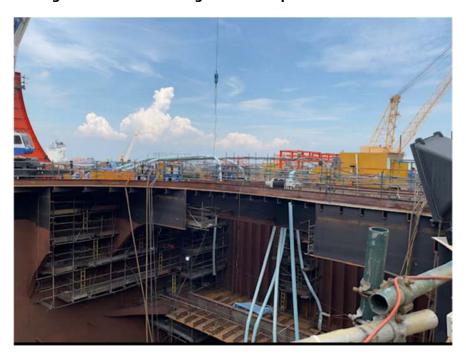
View of the large opening inside the tanks for turret mooring to be fitted
